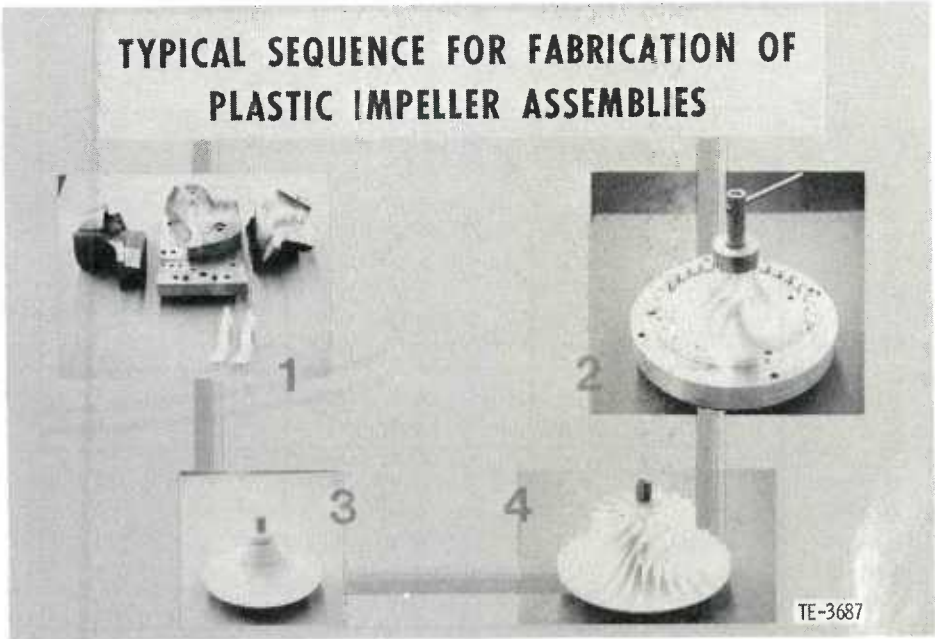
Typical sequence for fabrication of plastic impeller assemblies.
